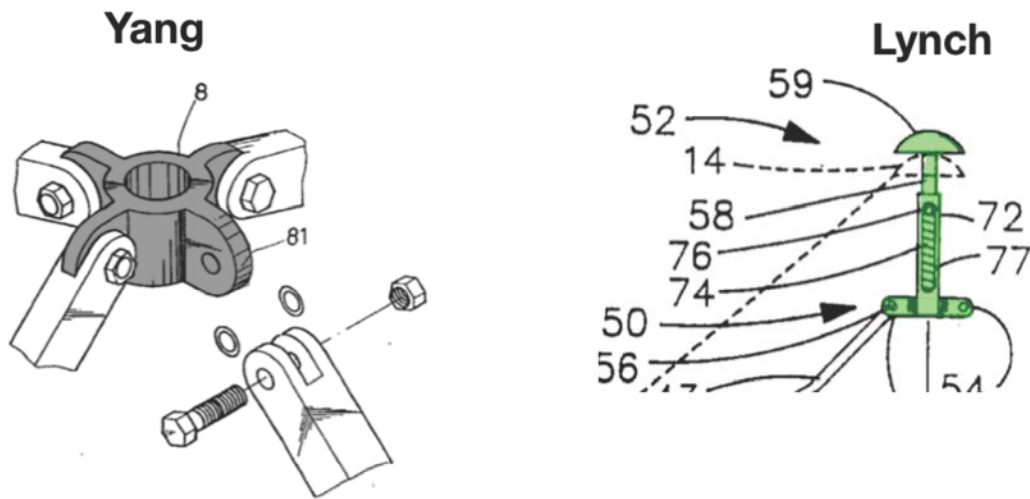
Figure F: The roof bearing beam shaft 8 of Yang (left, grey) and the center pole of Lynch (right, green).
